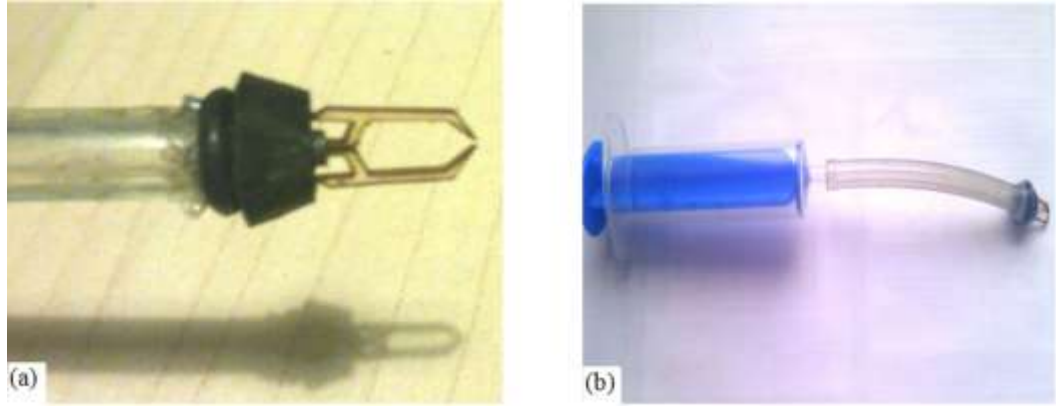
(a) Assembled gripper, (b) Complete final prototype (with syringe).
